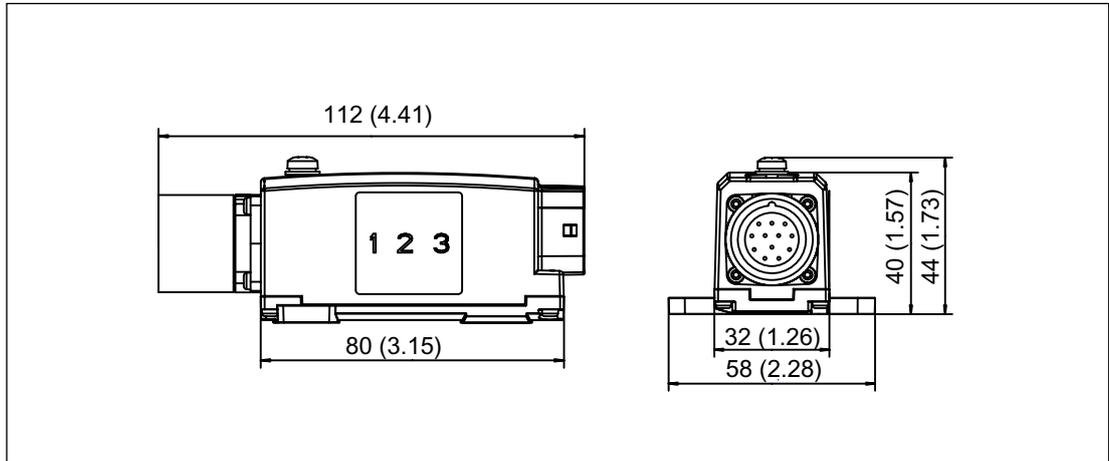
Dimension drawing SME25, Order number 6SL3055-0AA00-5HA3
